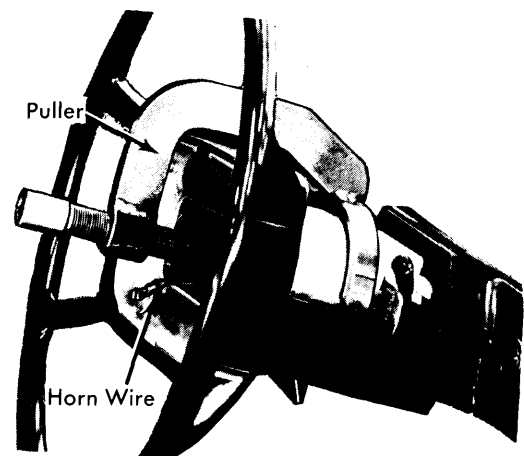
Using Puller to Remove Steering Wheel from Shaft – 164 Models
